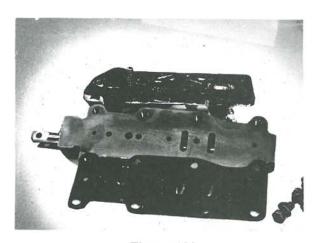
Replace the bolts that fasten the cover to the valve body. Tighten to specified torque. (See torque chart.)
